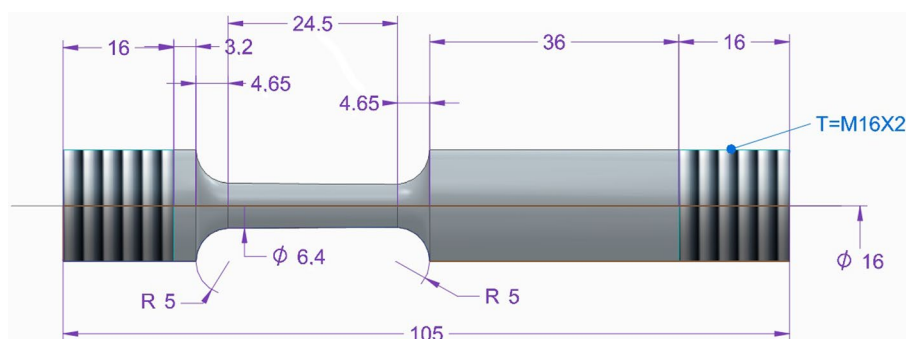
Geometry and dimensions are given in millimeters of the specimen used in the fatigue test
